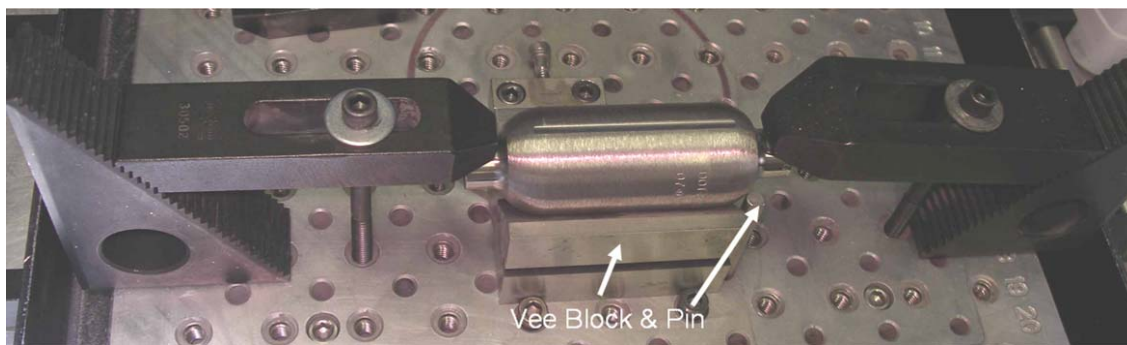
Mounting Fixture in LENS Machine Holding Bottle for Repair
